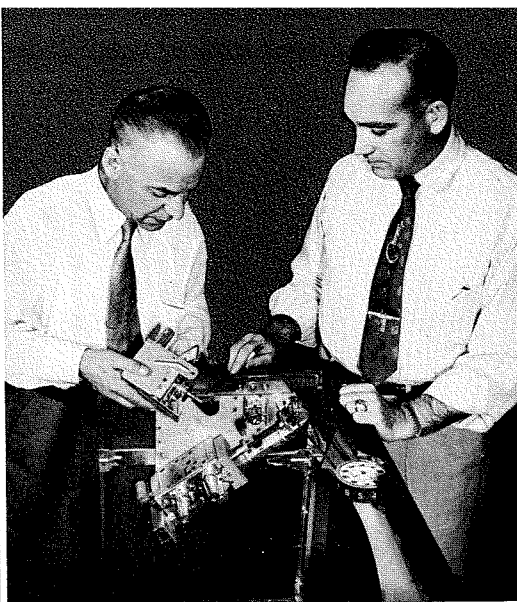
E. J. Sperber (l) and C. Schlicht, mechanical engineers in Television Receiver design, are inspecting mechanical assembly of a tri-axially operated TV tuner, featuring a belt-driven channel indicator.
